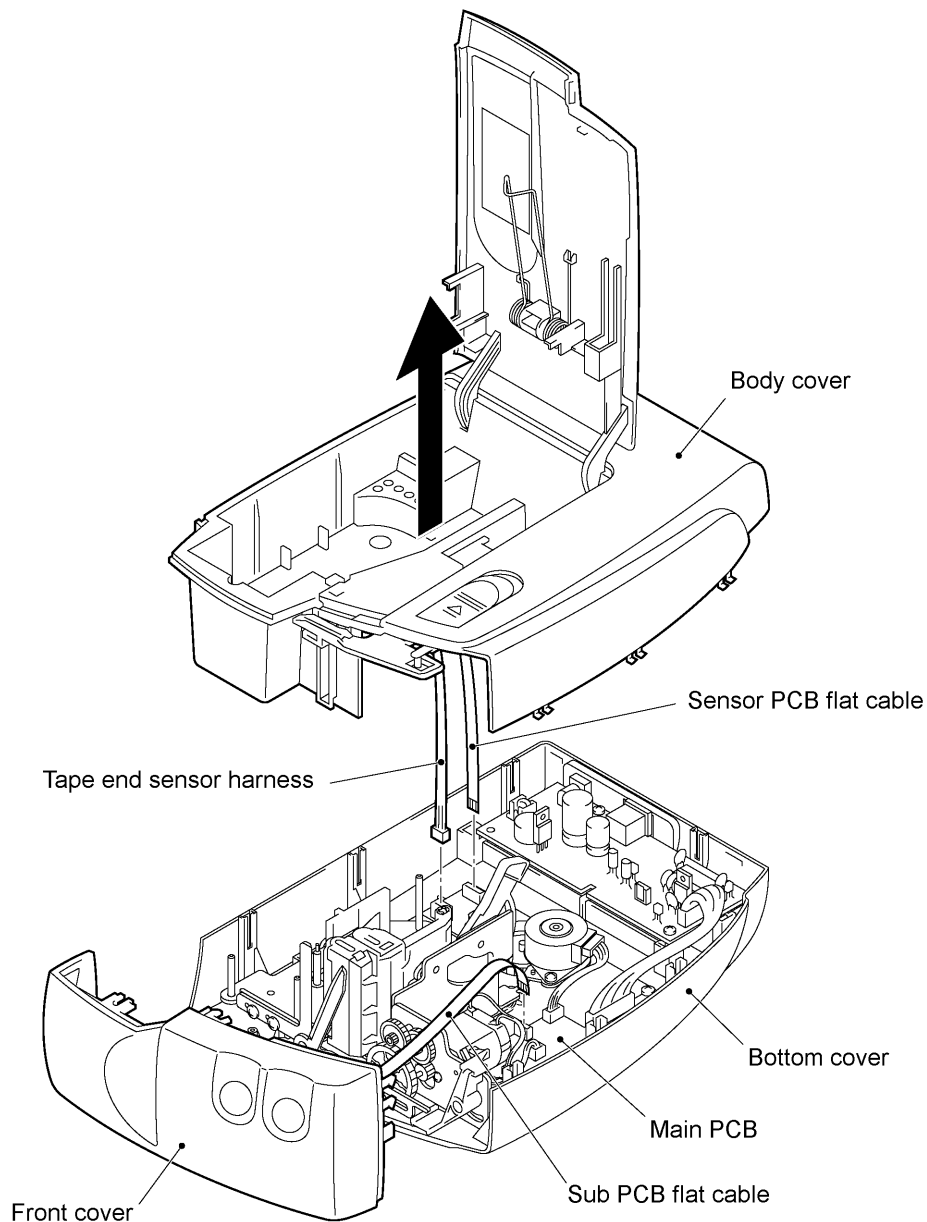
Disconnecting the Sensor PCB Flat Cable, Tape End Sensor Harness, and Sub PCB Flat Cable from the Main PCB
